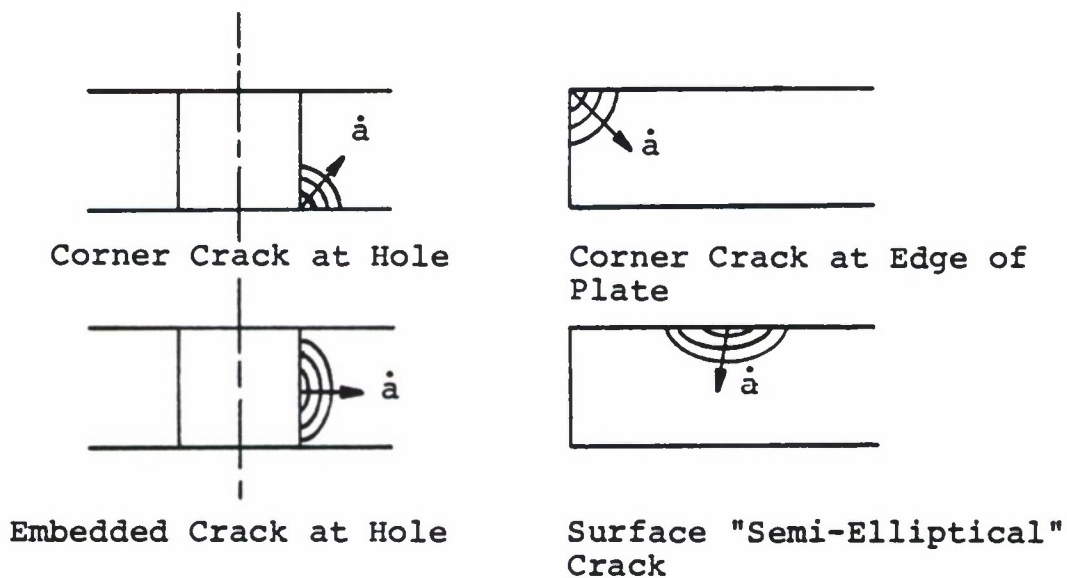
Plan Views of the Fracture Surfaces of Several Three-Dimensional Crack Problems.
